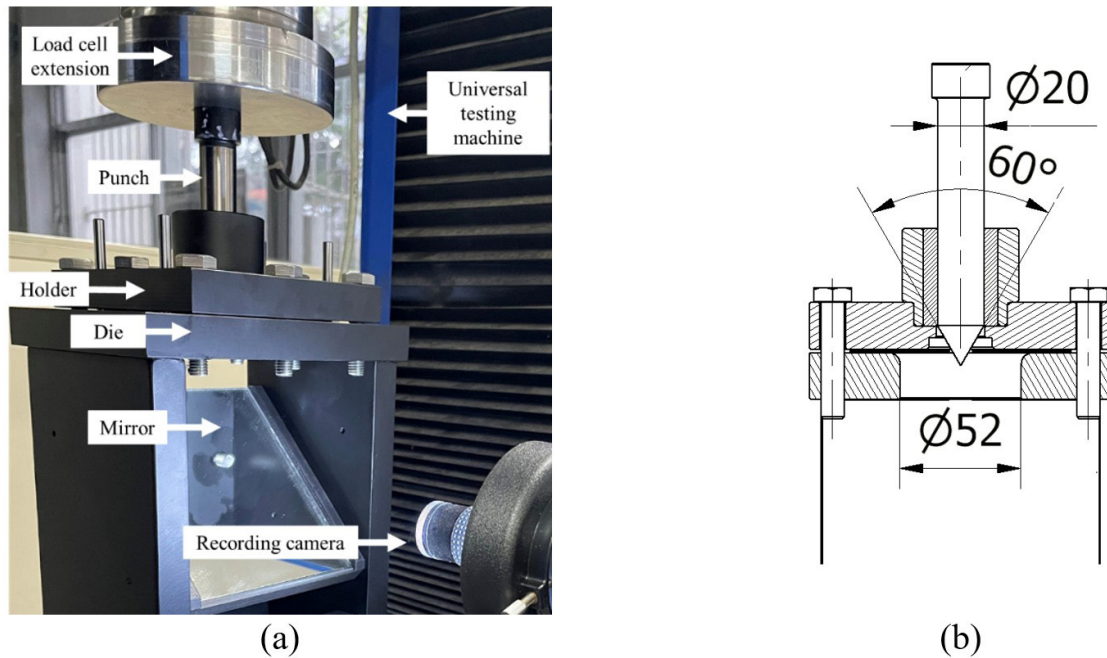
(a) Experimental setup for the HET and (b) tooling details [2].
